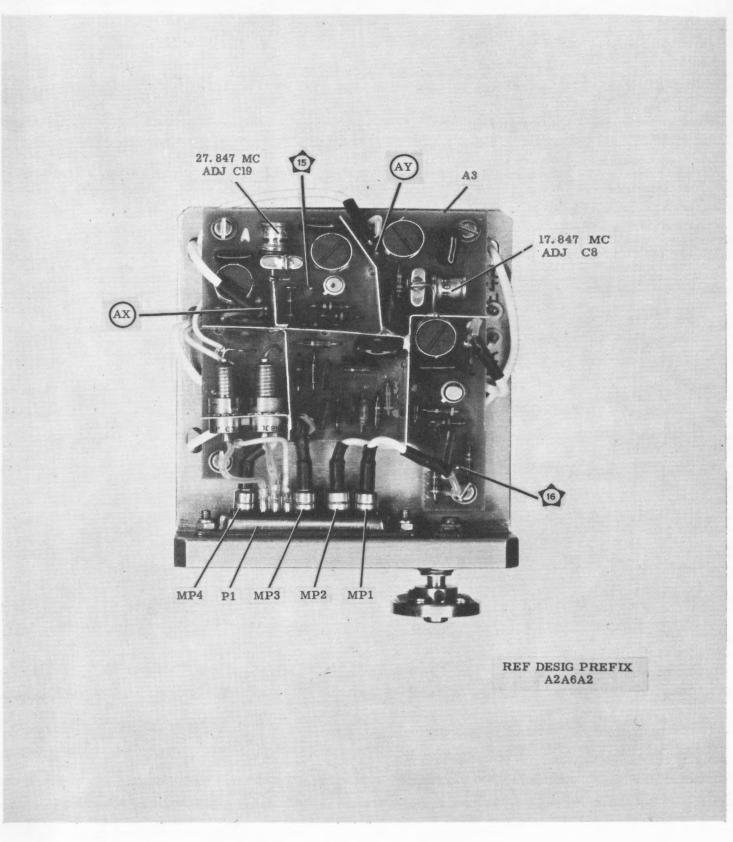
100 KC Synthesizer Electronic Subassembly, Front View, Component and Test Point Location
